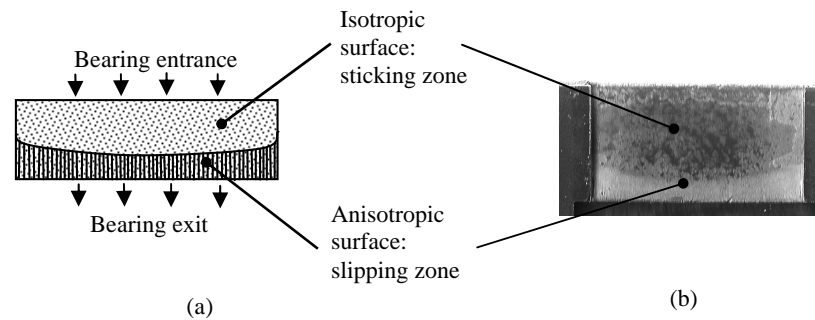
A clear separation marking is visible on post-extrusion die bearing surfaces: (a) A schematic drawing of the sticking–slipping transition on the bearing surface, shown together is the surface topography in these two zones; (b) A photo taken of die #4, similar to Fig. 2.19, suggesting repeatability of this observation.
